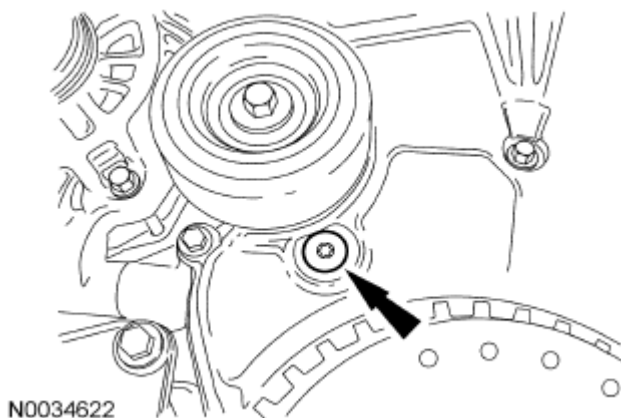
Locating Lower Front Cover Timing Hole Plug
